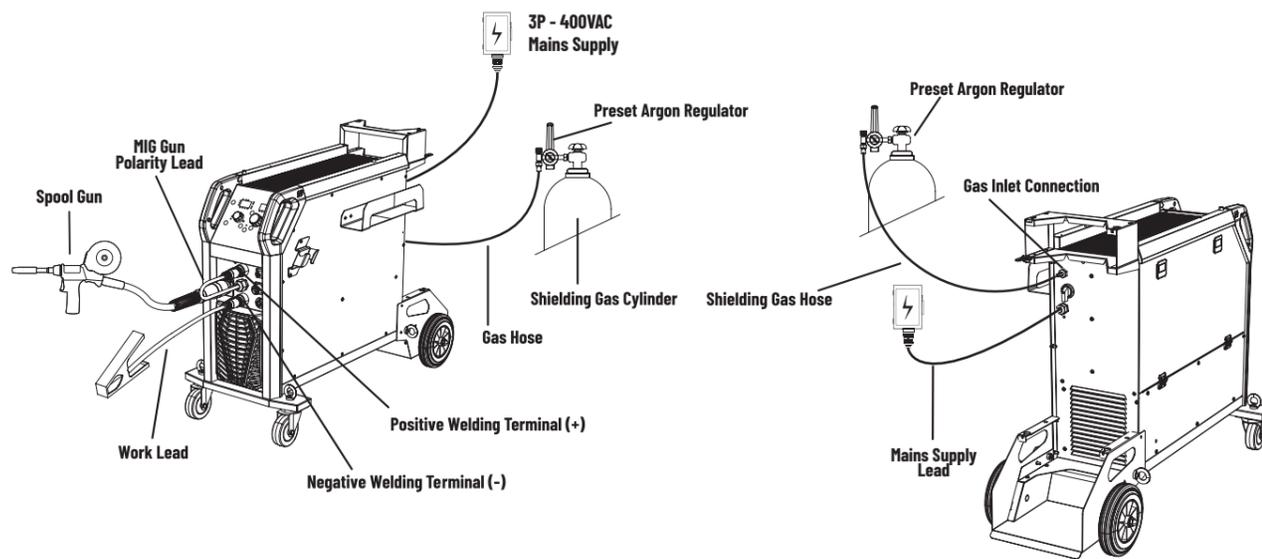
Setup with Spool Gun for Gas Shielded MIG Wire
